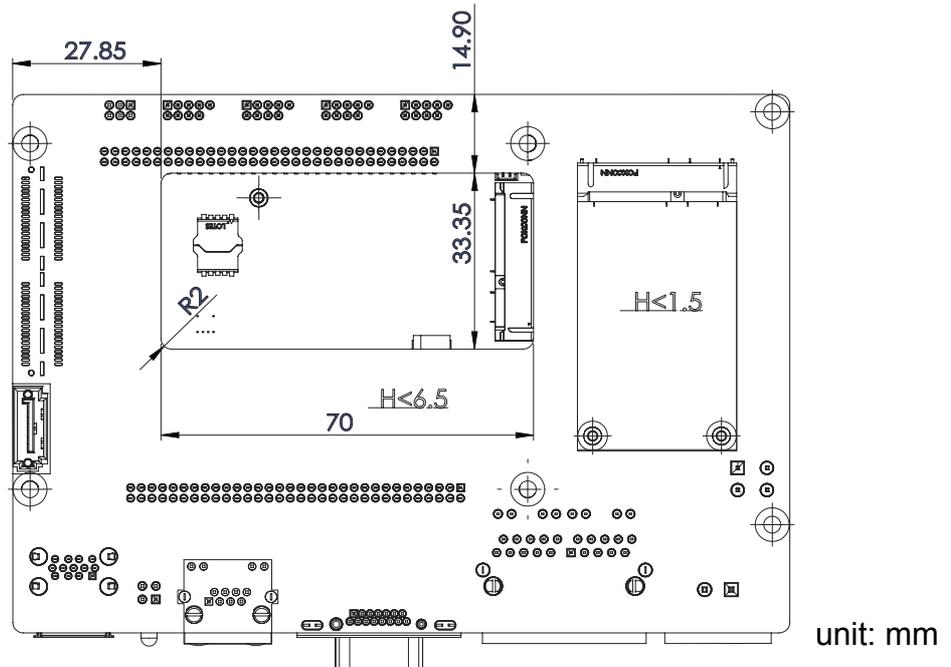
MIO-6300 Mechanical Drawing (Bottom View)
